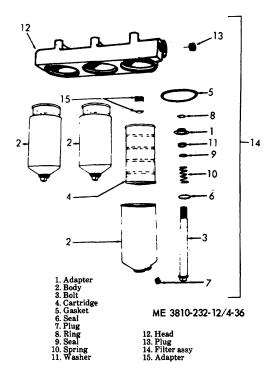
Carrier engine oil filter, disassembly and reassembly.
